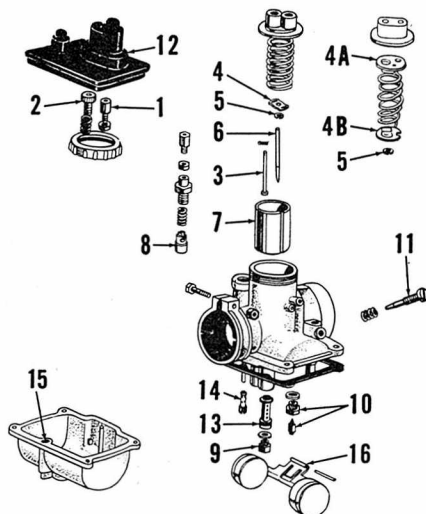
Exploded view of Mikuni VM carburetor. Spring guide (4A) and spring seat (4B) are used on A7 models.
